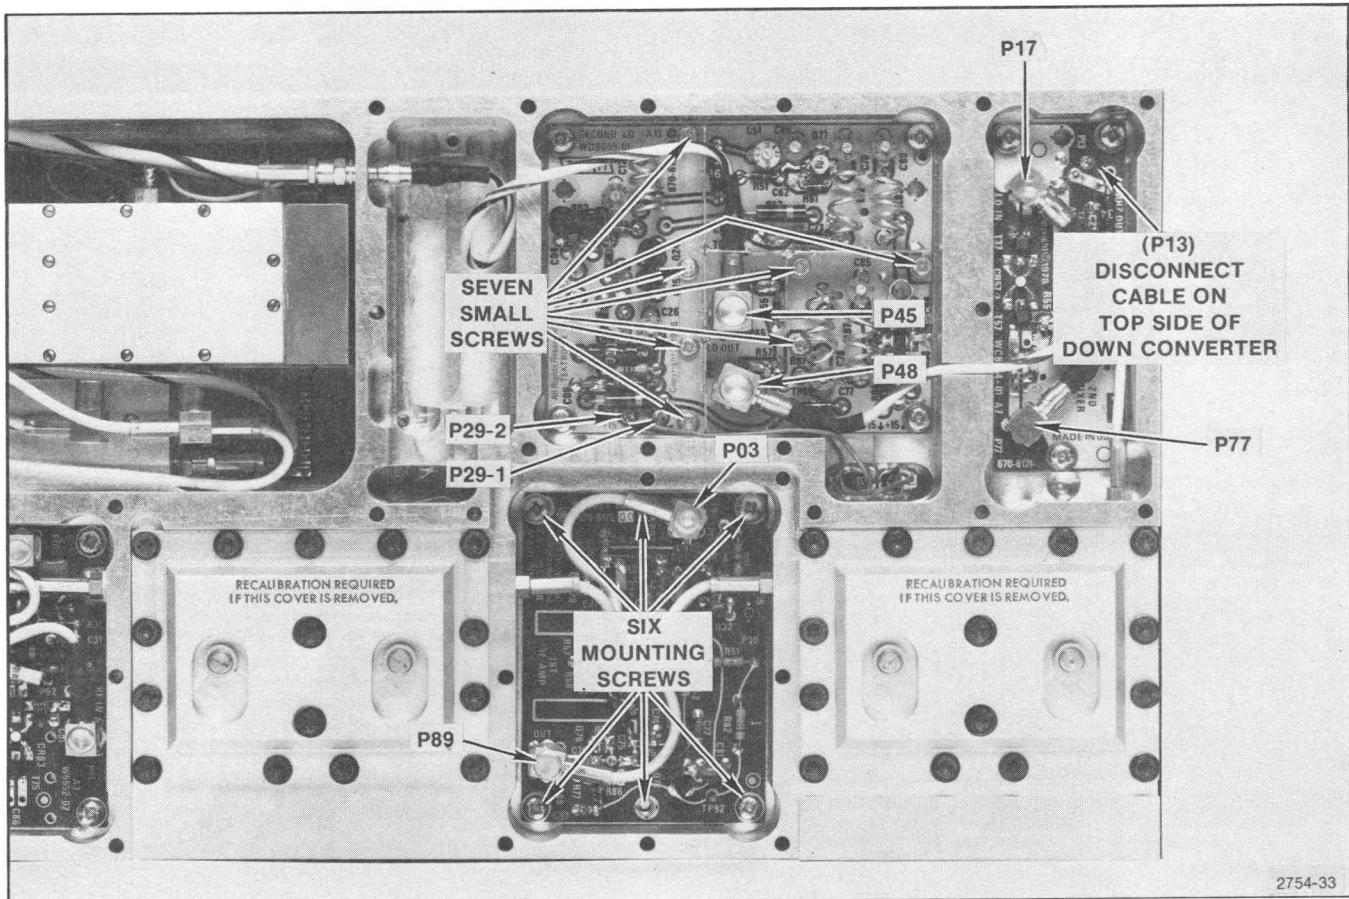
Removing the 1st IF amp, 2nd LO, and 2nd mixer boards.
